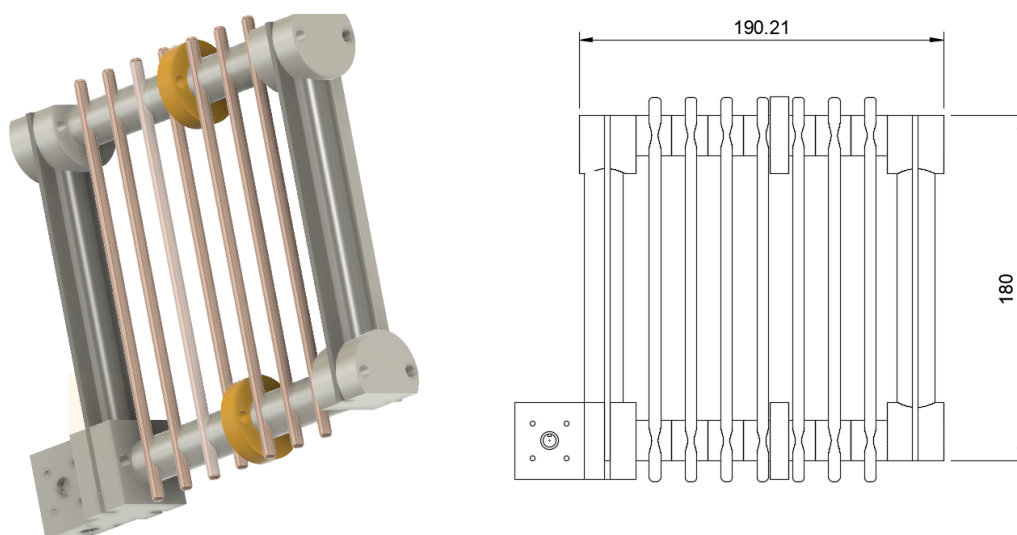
3D drawing of the first ZEF reactor concept with heat pipes, along with a schematic view showing the dimensions in millimeters.
